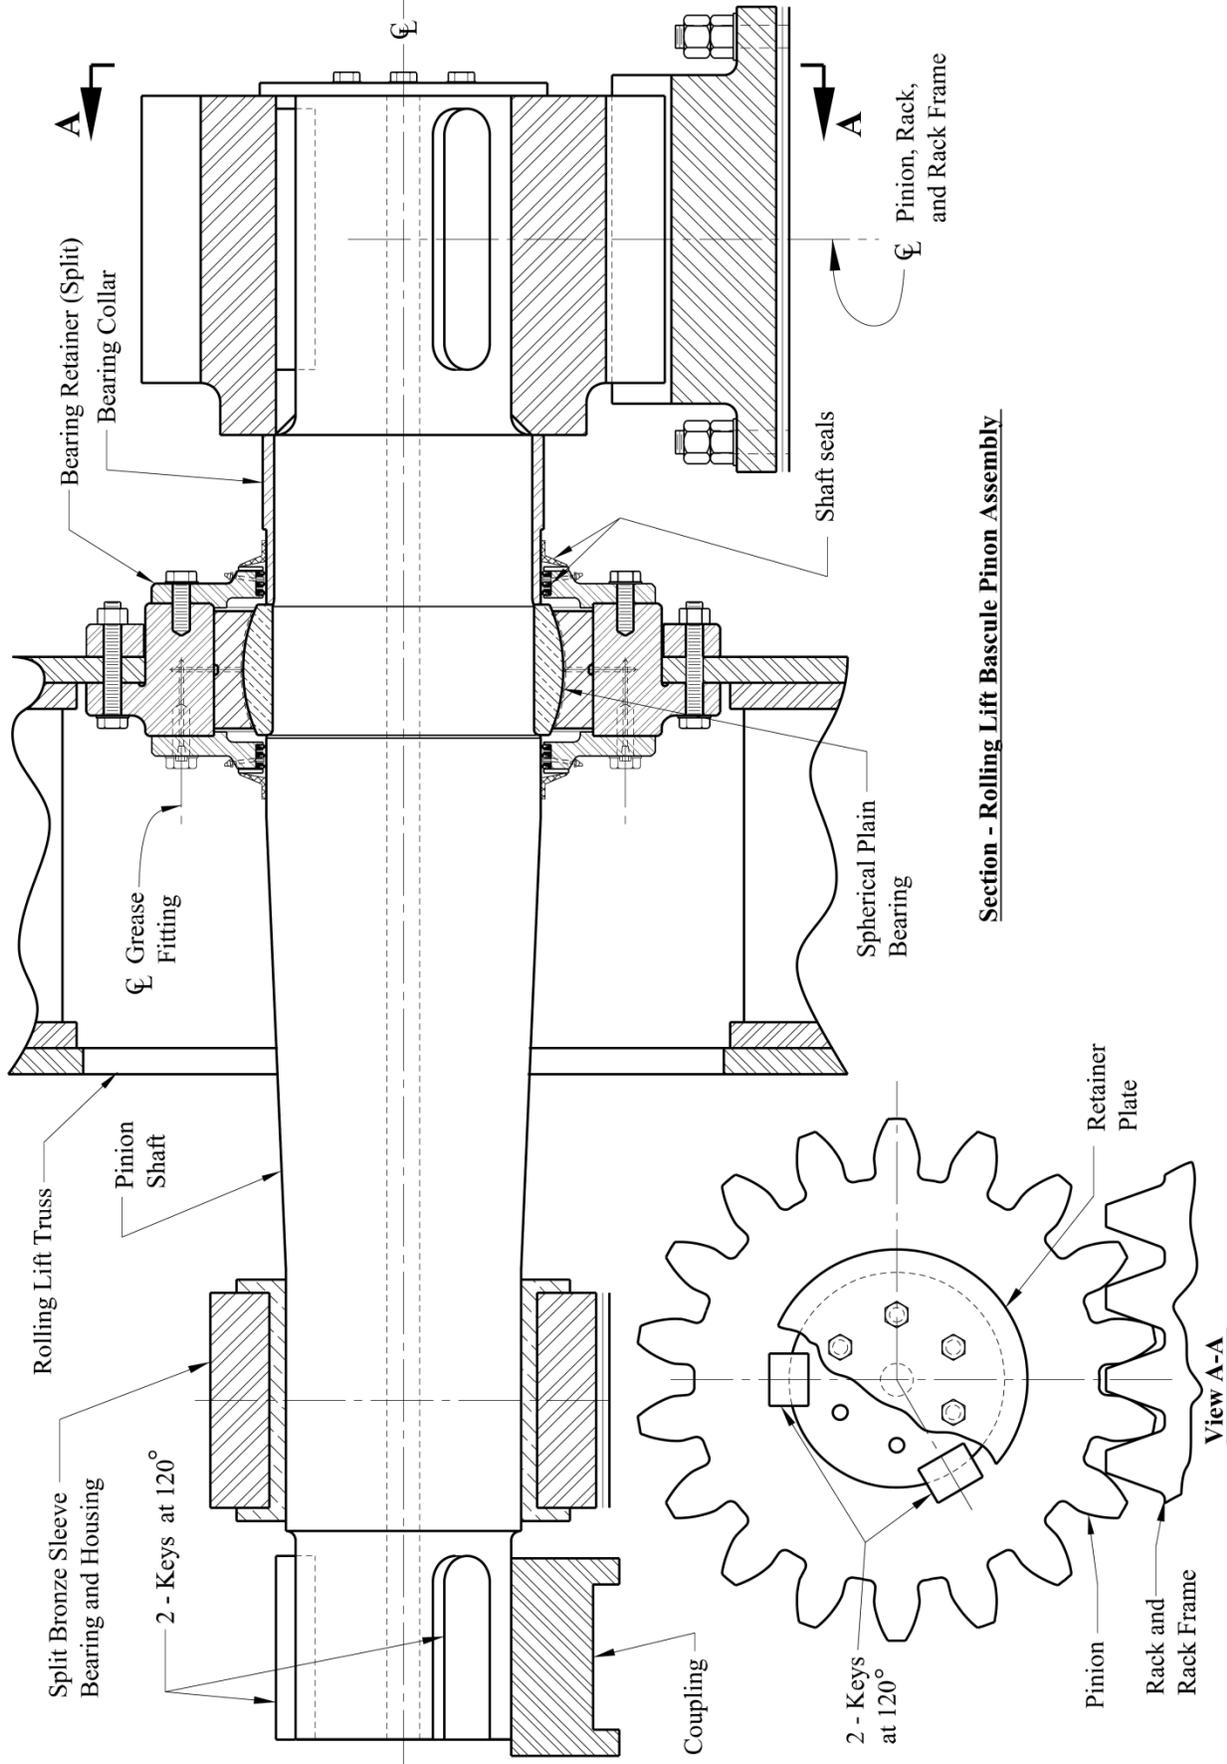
Typical Pinion and Ring Gear Assembly on a Bascule Bridge
